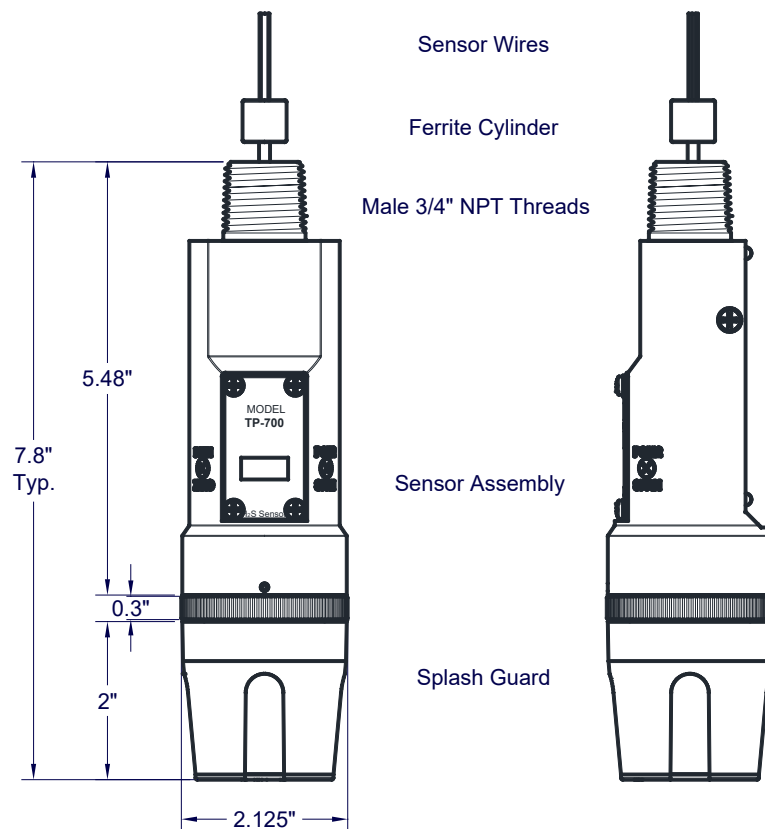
Outline and Mounting Dimensions (Sensor Assembly only)
